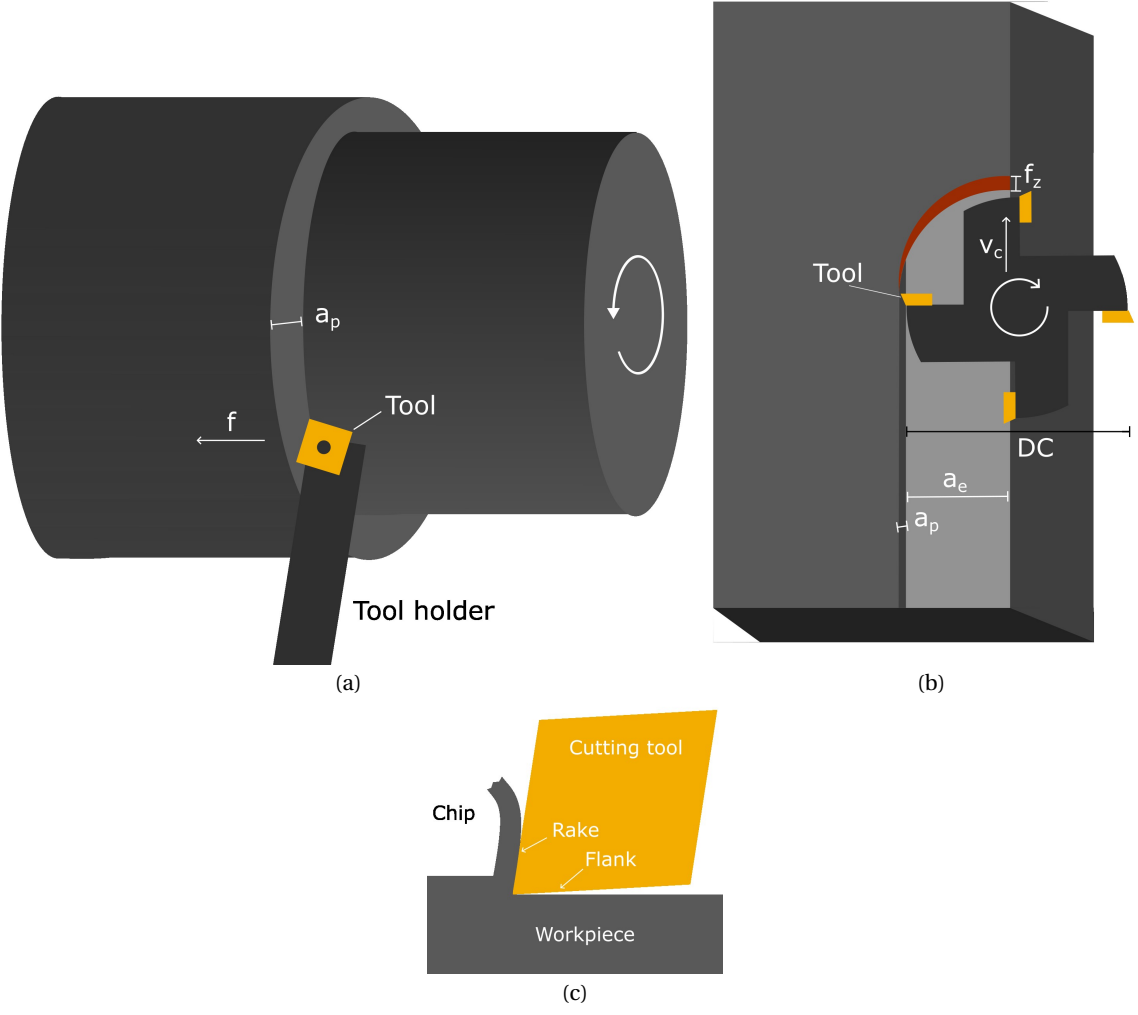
Schematic illustration of the a) turning and b) up-milling process with important machining parameters, c) cross-section of tool and workpiece.
